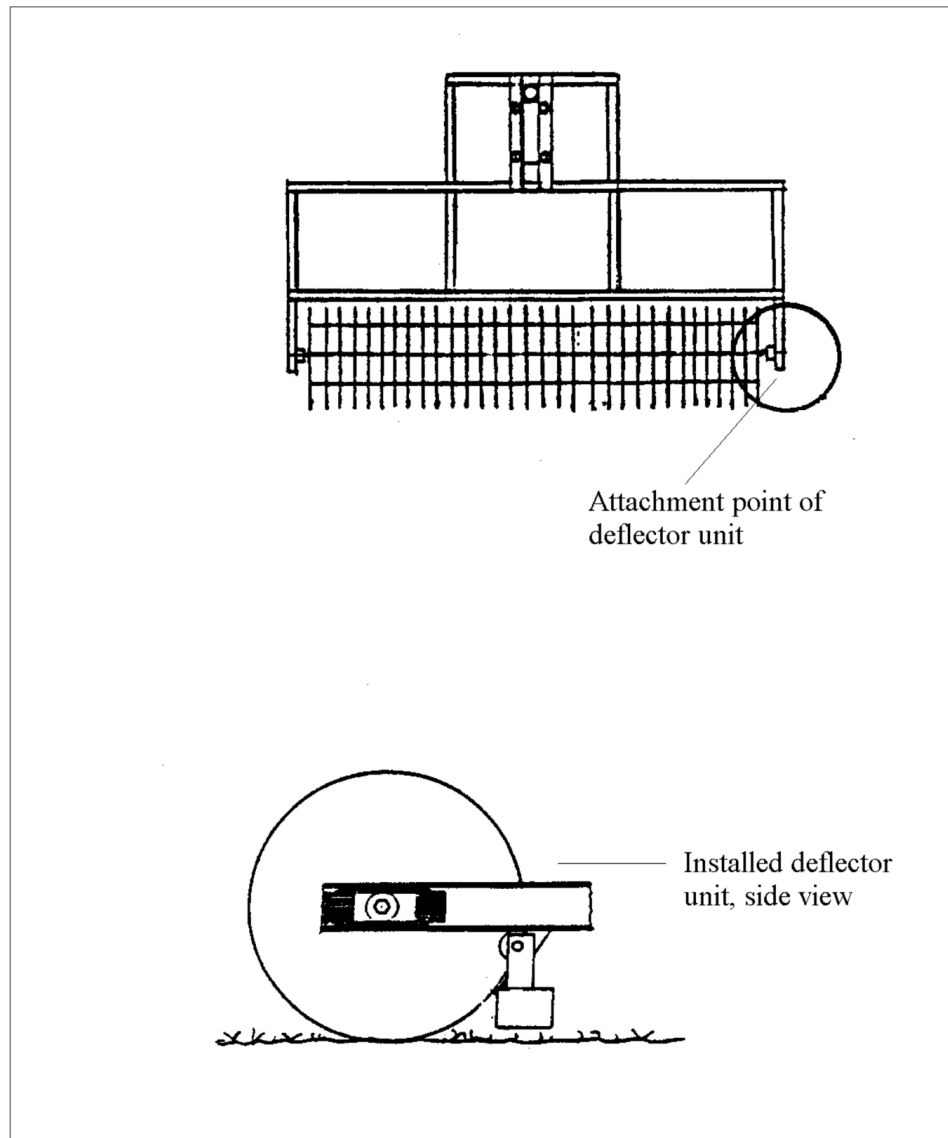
Ball Deflector Unit and Attachment, Enlarged View
